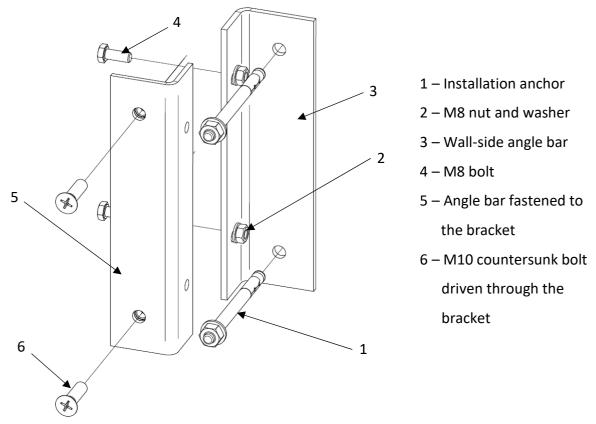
The kitting of offset brackets for the guide rails and the shaft box
